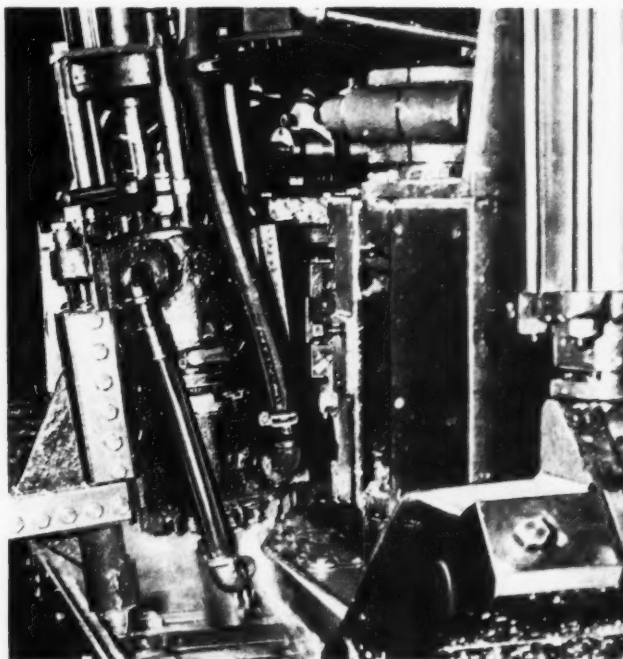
Vertical Spindle of Onsrud Contour-milling Machine Arranged for Automatic Tilting to Produce Twist or Varying Bevel Surface on Work
